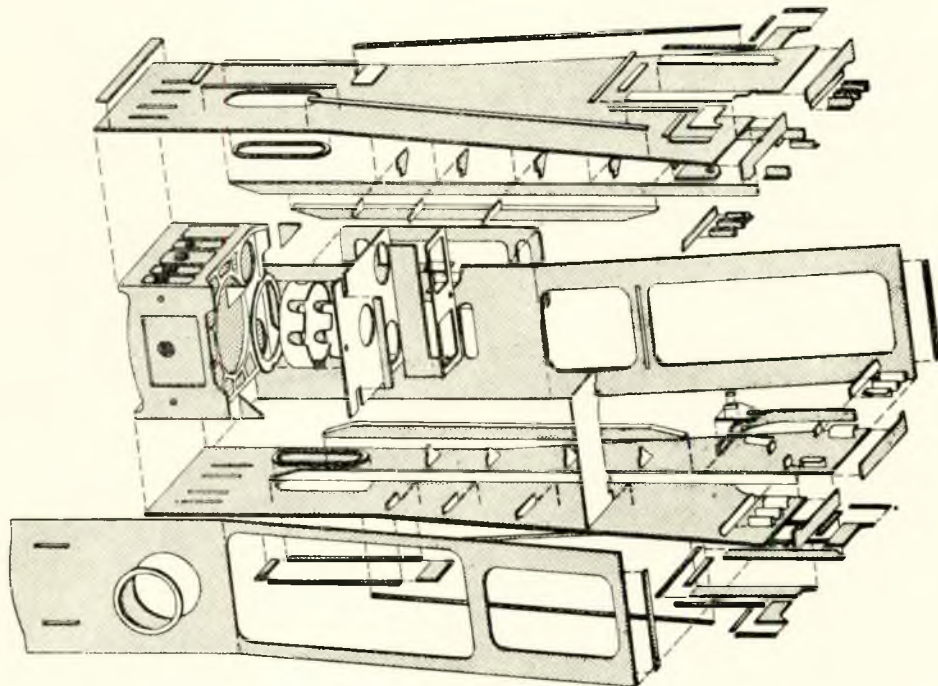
Exploded view of entablature in position for welding (This type of drawing is commonly used in the welding shops)
